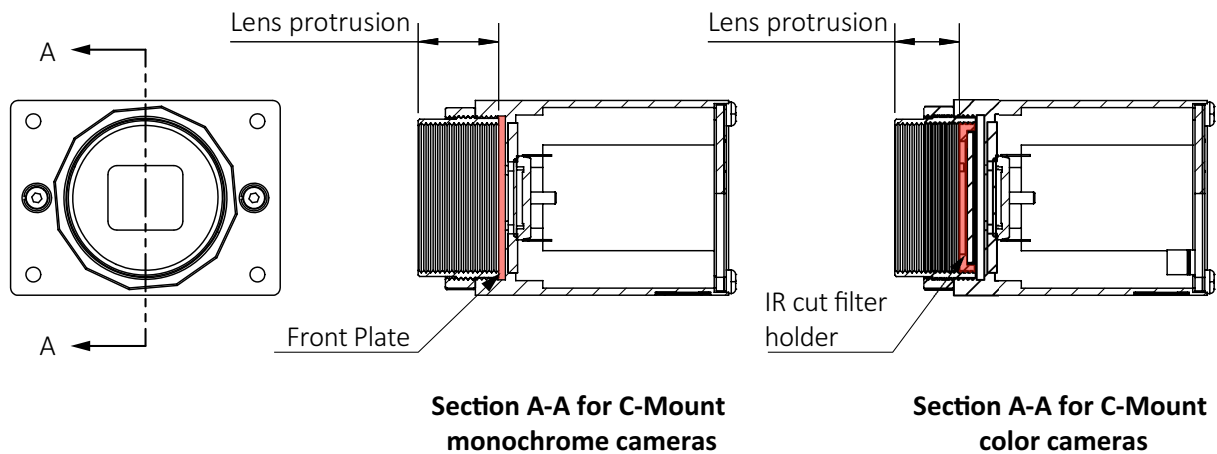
Cross section of typical Prosilica GC assembly with C-Mount
